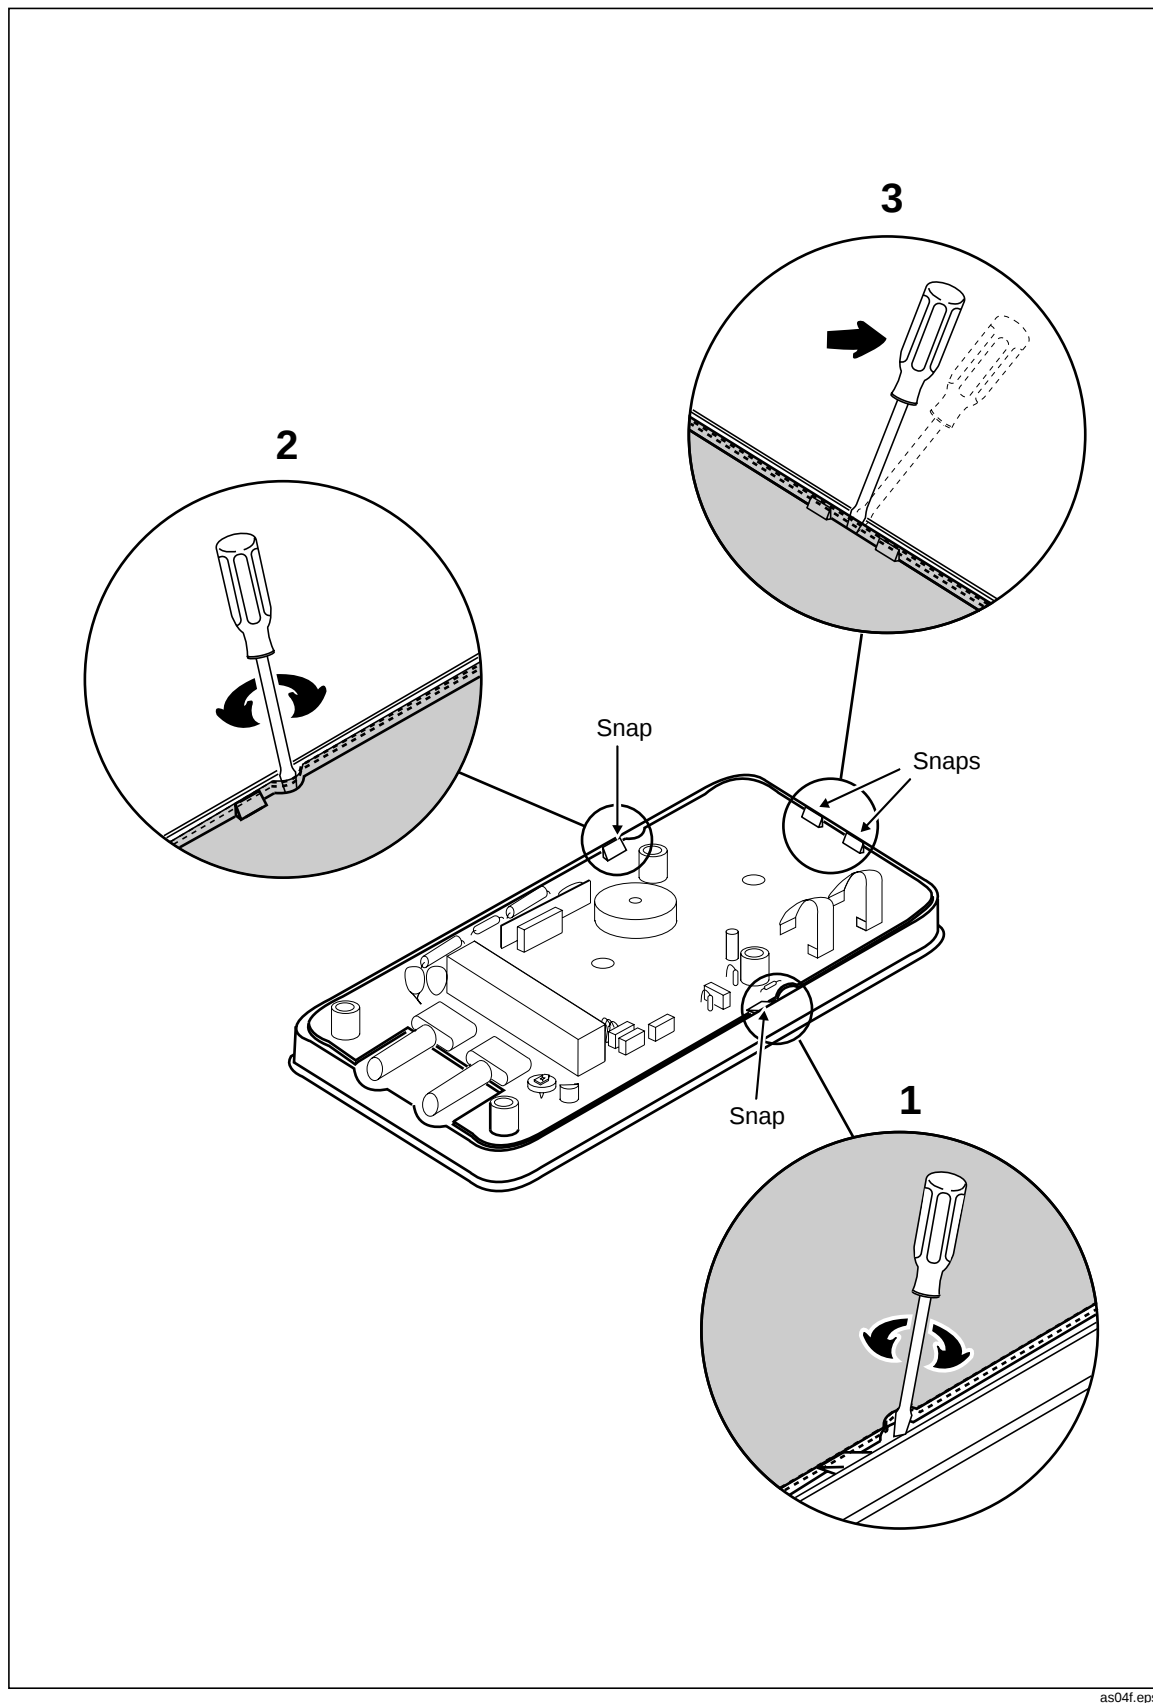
Removing and Reinserting the Printed Circuit Assembly
